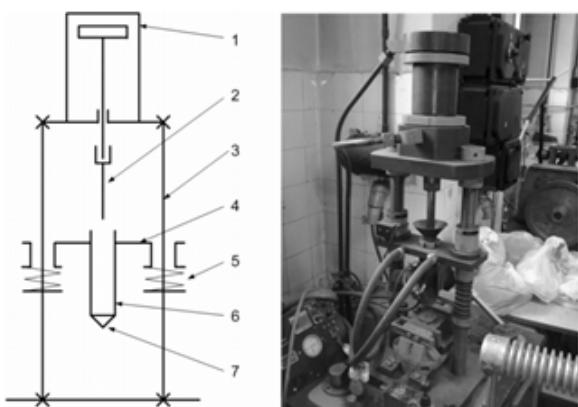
Injection molding machine: 1—plunger, 2—Injection ram, 3—columns, 4—movable plate, 5—spring, 6—cylinder, 7—nozzle
